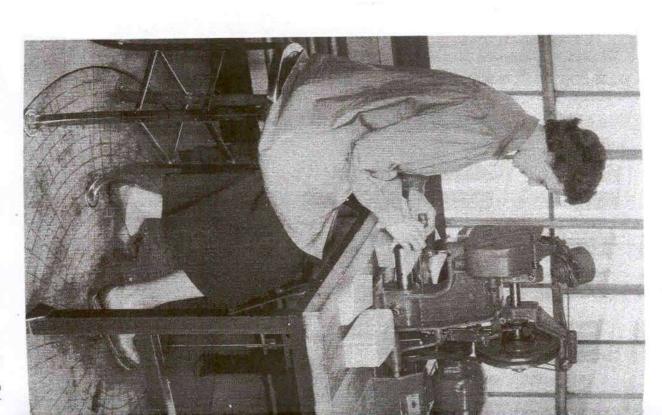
View of Machine With Operator - Machine Set Back From Edge of Bench
